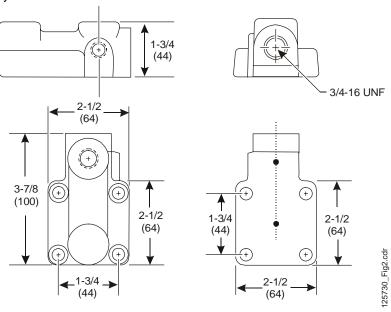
CST29A Adapter Block Dimensions, in. (mm)
